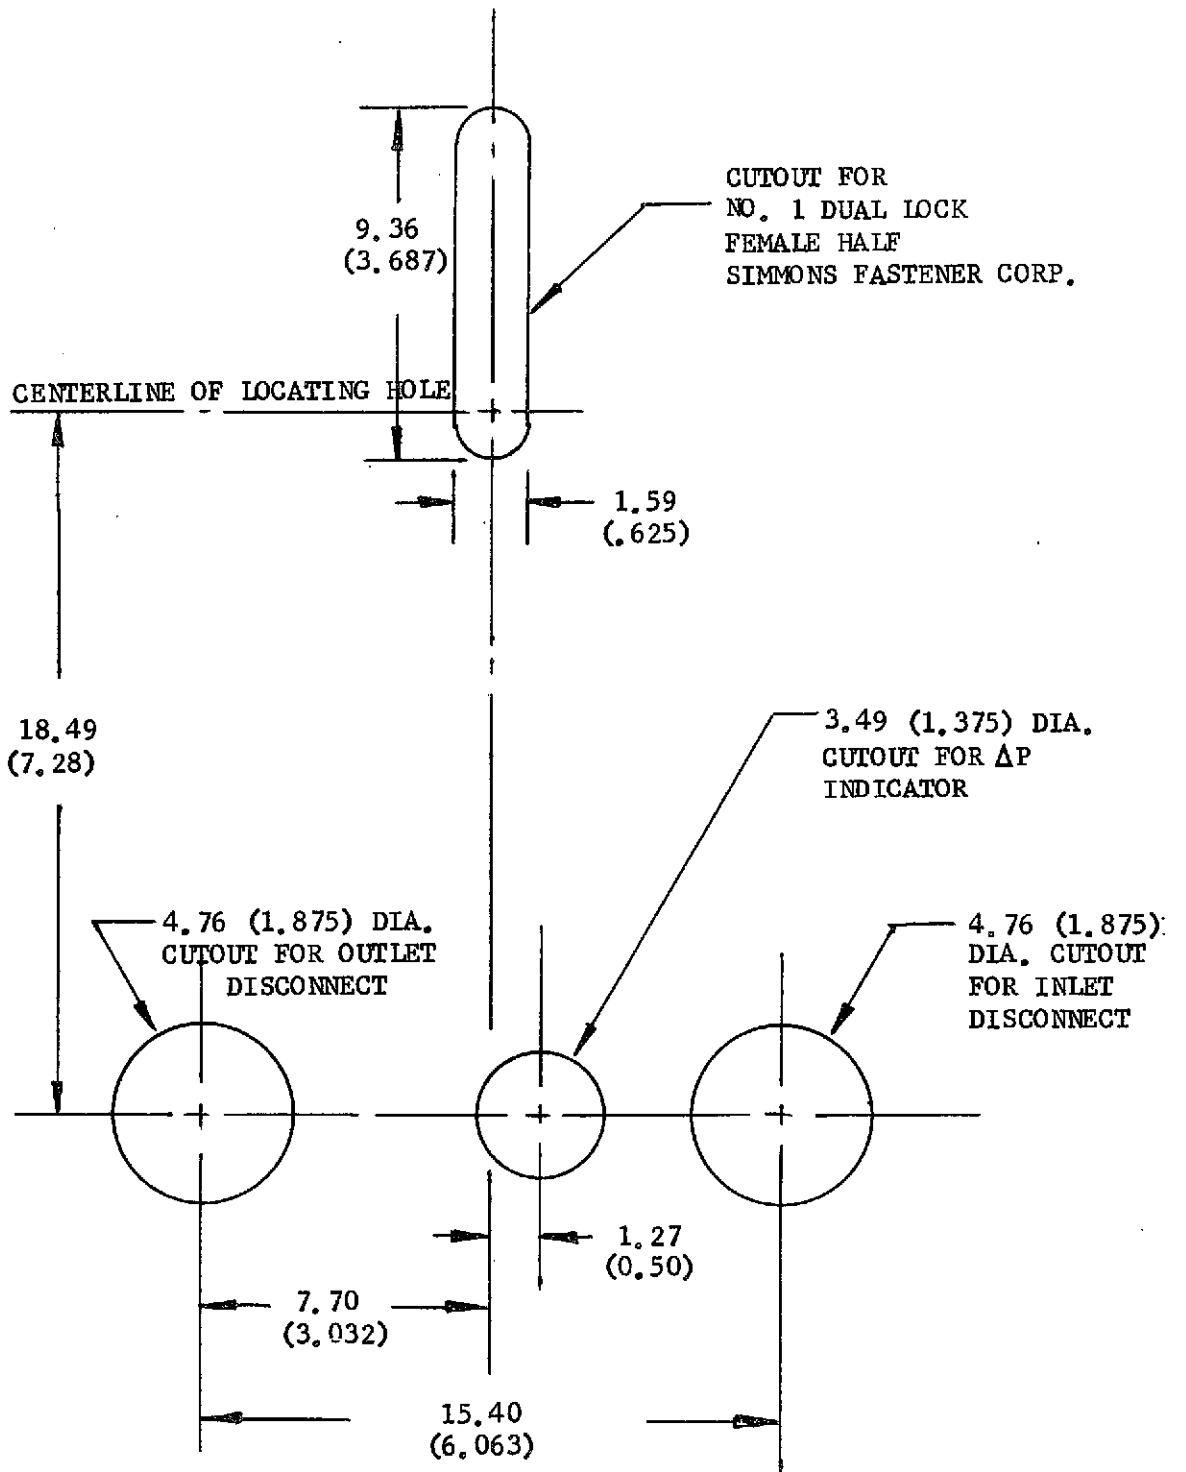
INTERFACE PANEL DIMENSIONS
